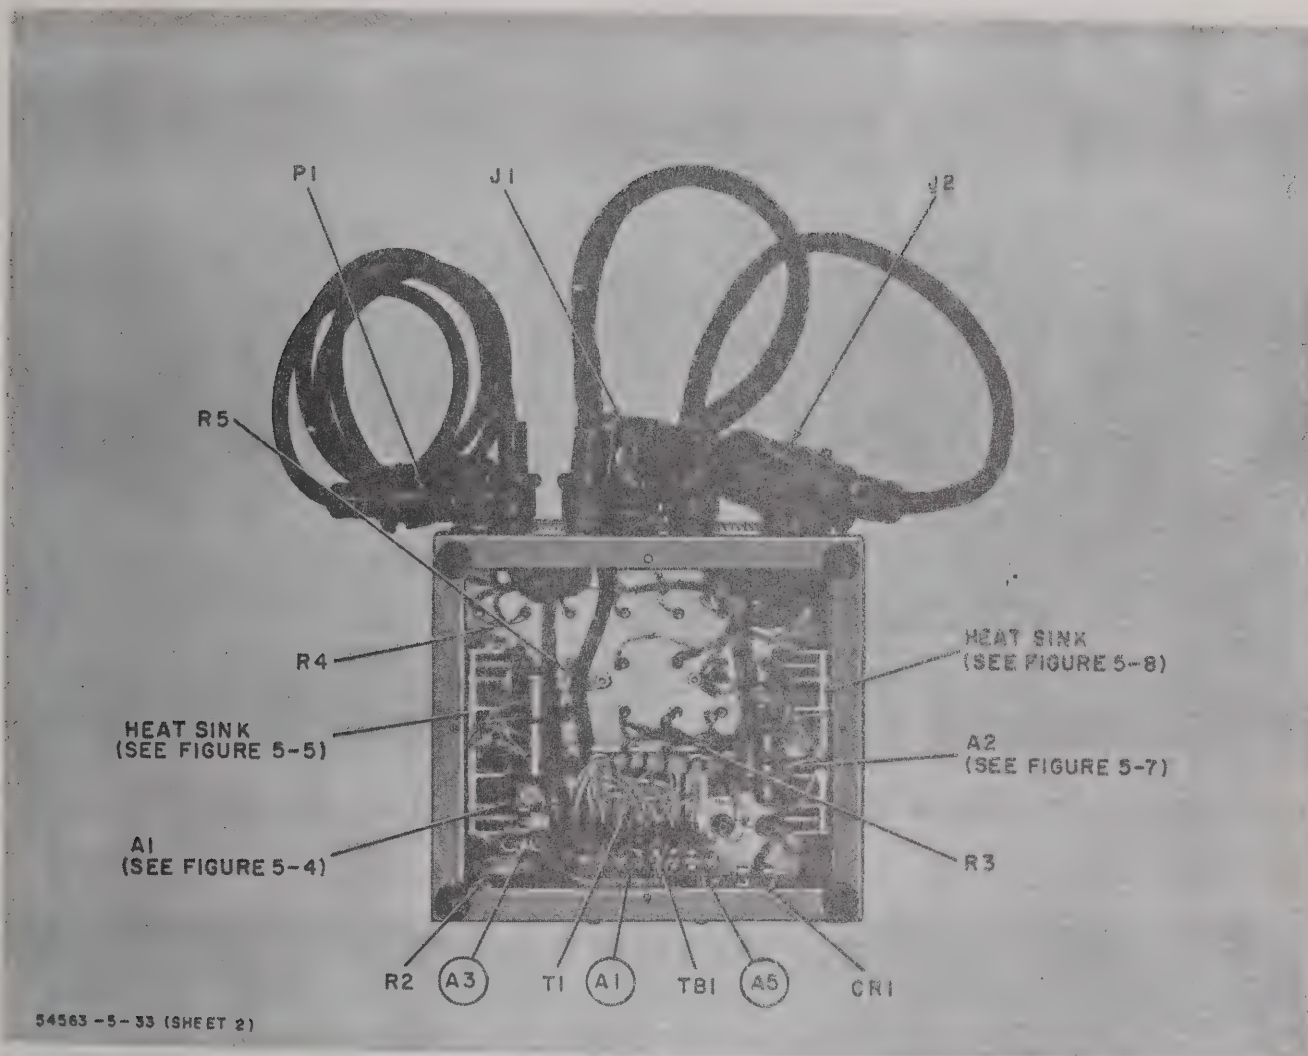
Test Set Coupler, MX-8153/TYA-11, Part Location (Sheet 2 of 2)
